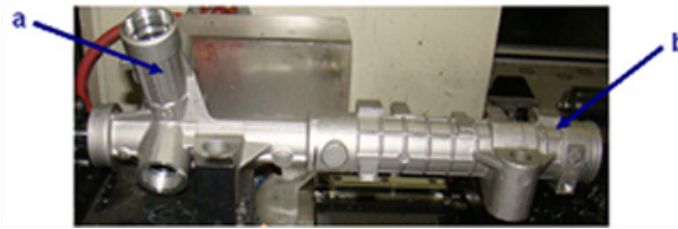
Steering hydraulic gear – (a) Housing, (b) Tube
